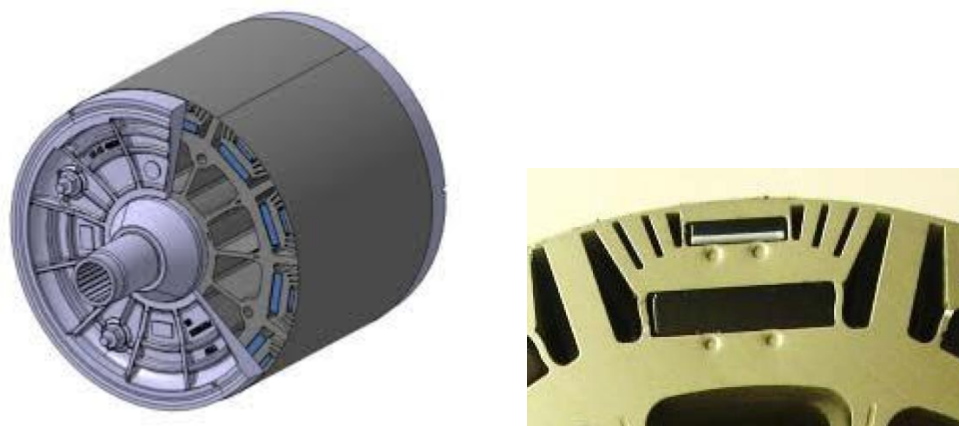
BMW i-3 machine rotor cross section (E-machine [9]-[11])
